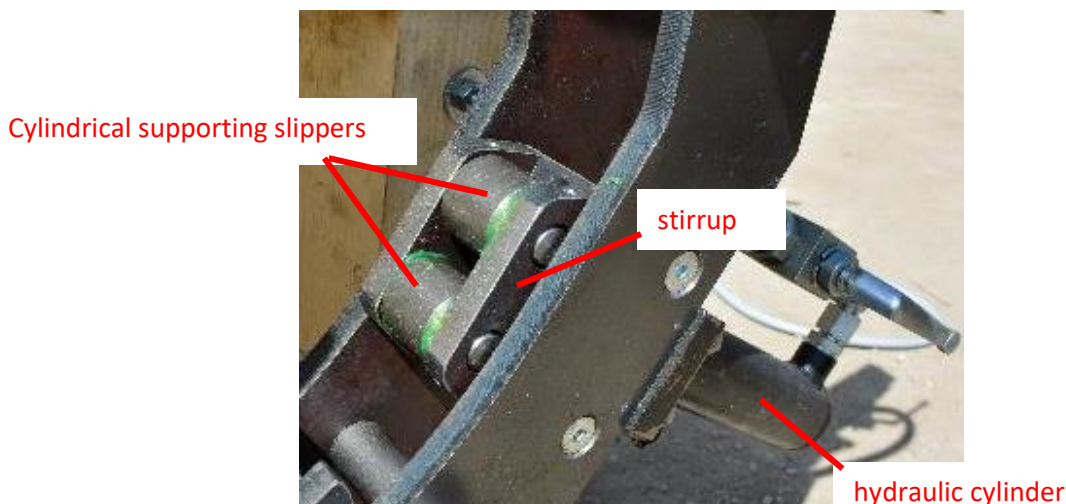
Cylindrical slippers mounted on the end of the working cylinder
